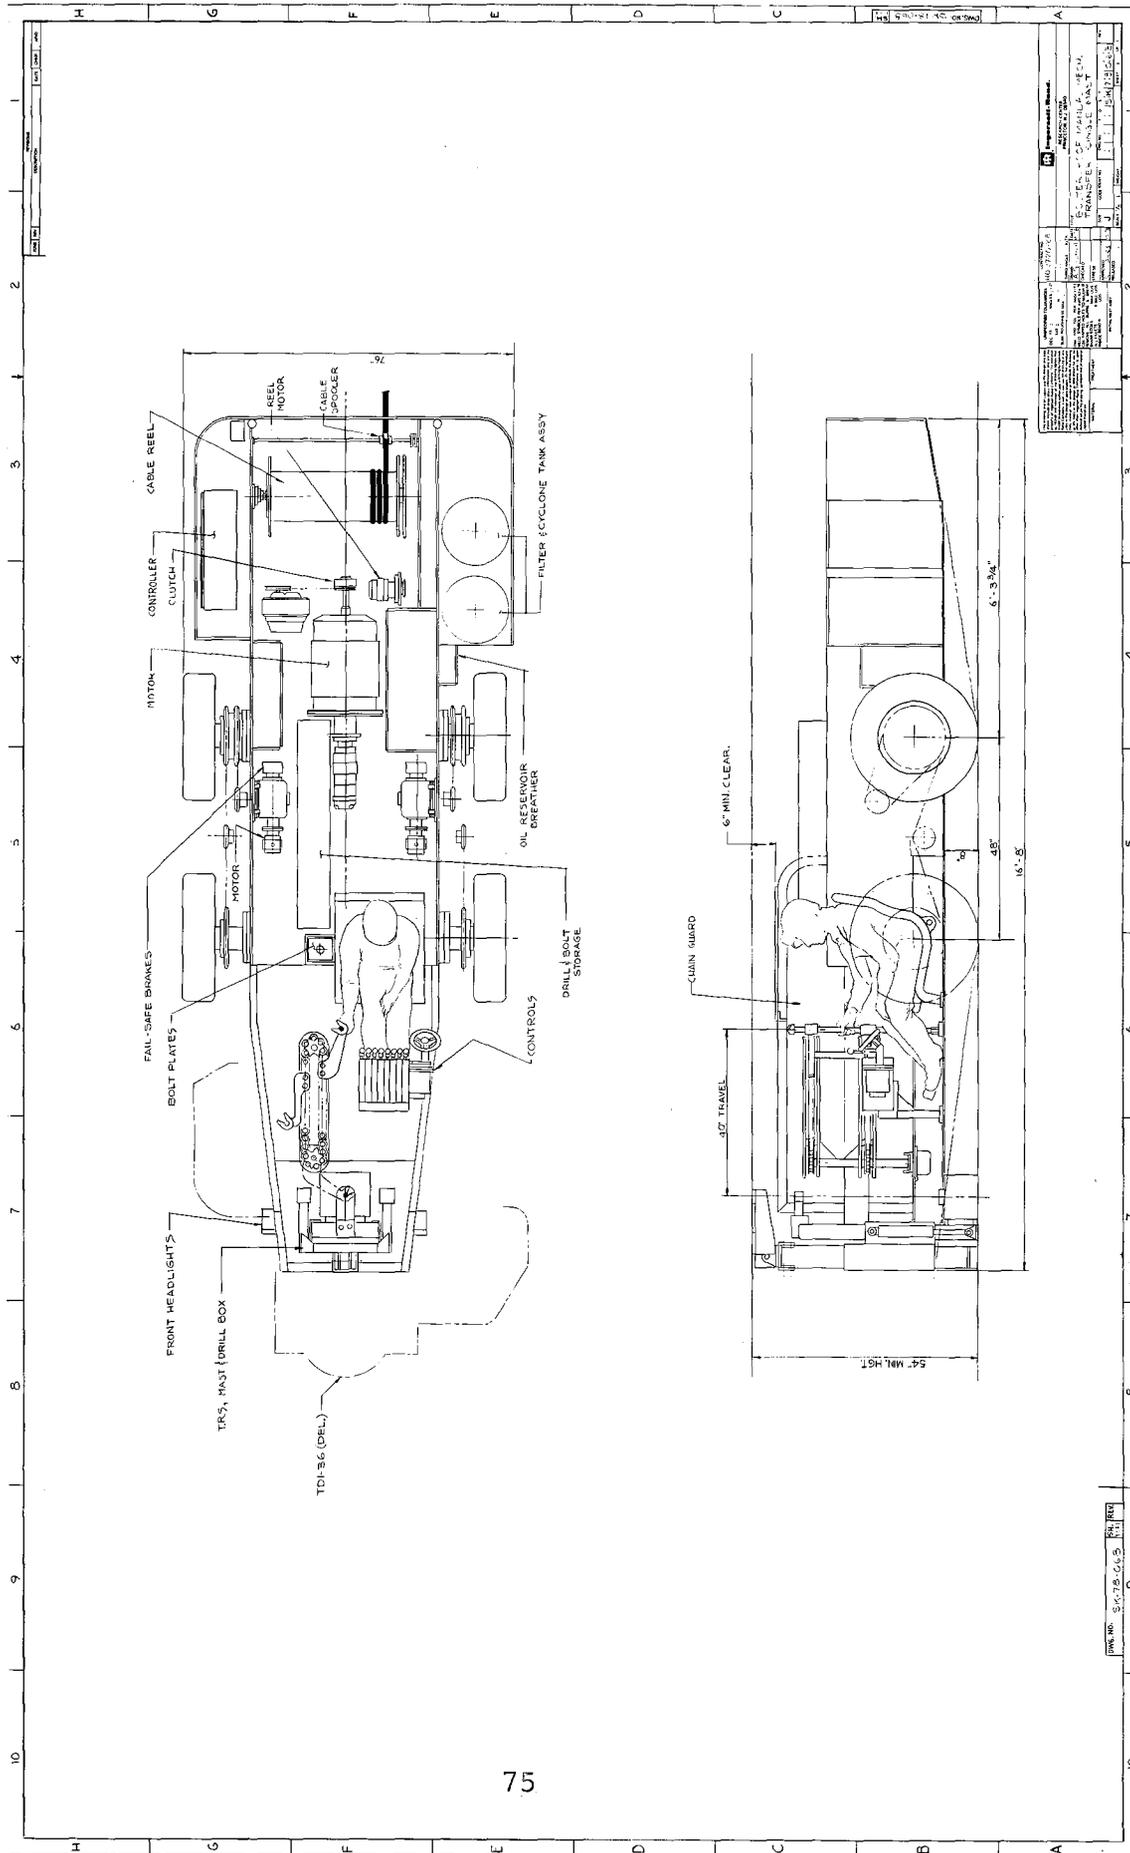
Plan and Elevation Views of the Transfer Bolter - Single Boom (New Chassis)
